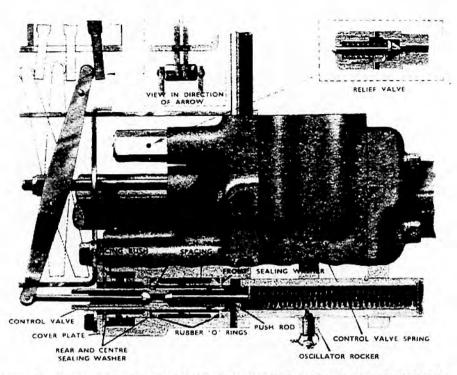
HYDRAULIC PUMP CUT AWAY TO SHOW THE CONTROL VALVE ASSEMBLY
